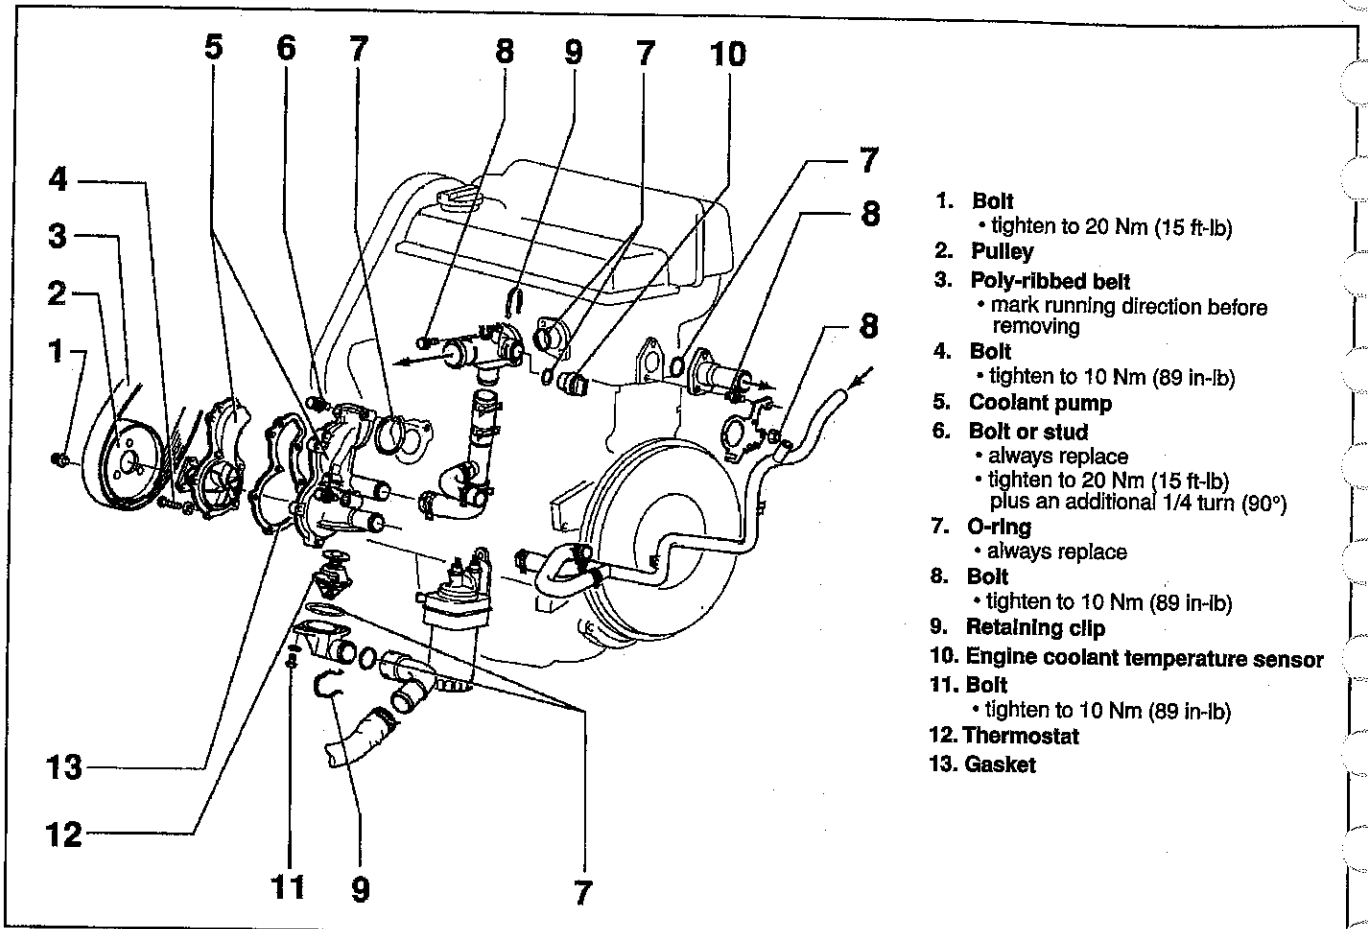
Exploded view of coolant pump and related parts on 4-cylinder diesel engine. Other 4-cylinder engines are similar.
